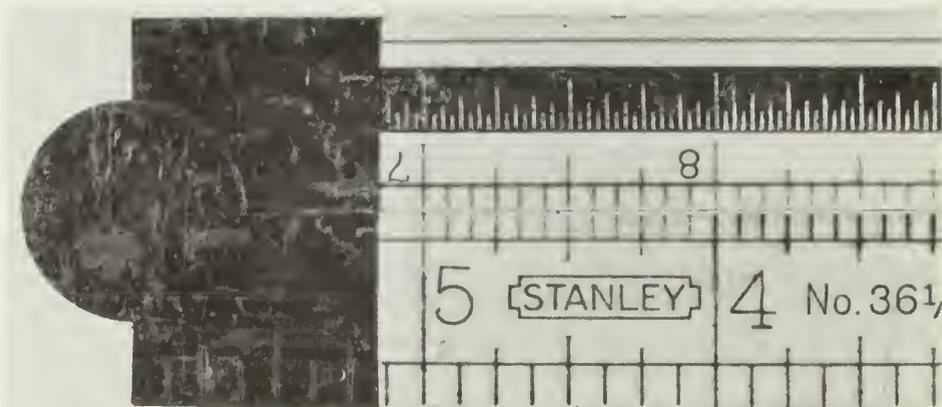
Typical 2 Fold Caliper Rule Construction (No. 36½L)
